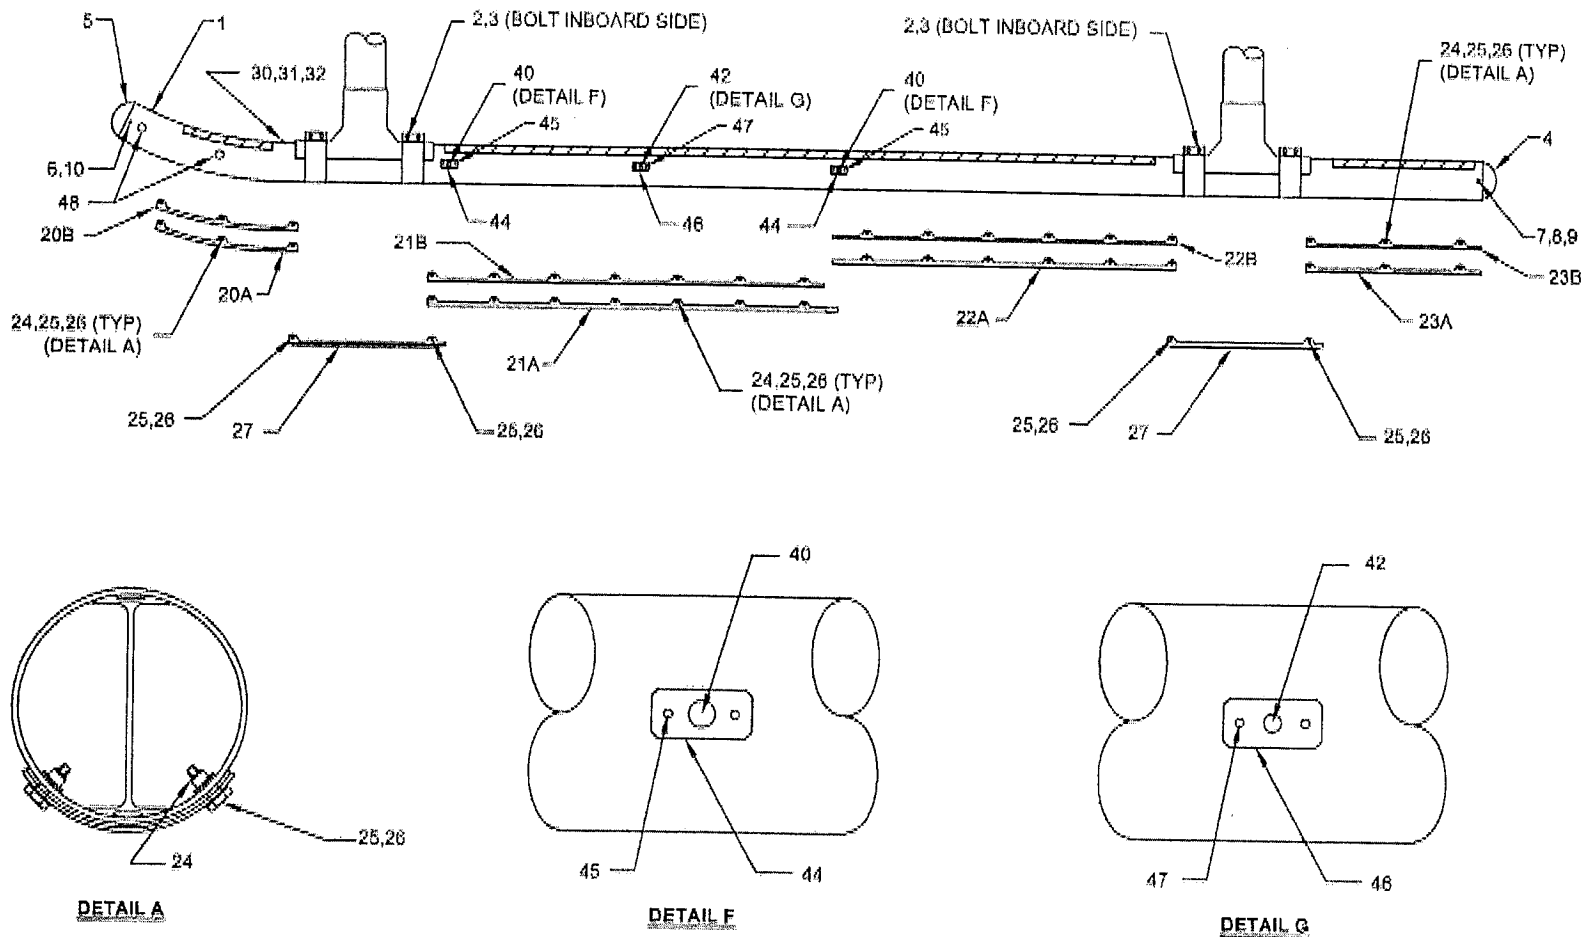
D135-751-011 SKIDTUBE INSTALLATION
